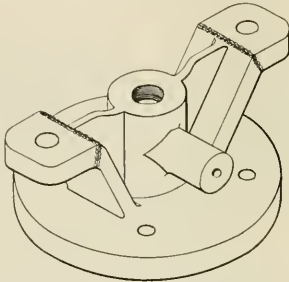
Air Signal Valve Casting Repaired by Gas Welding
